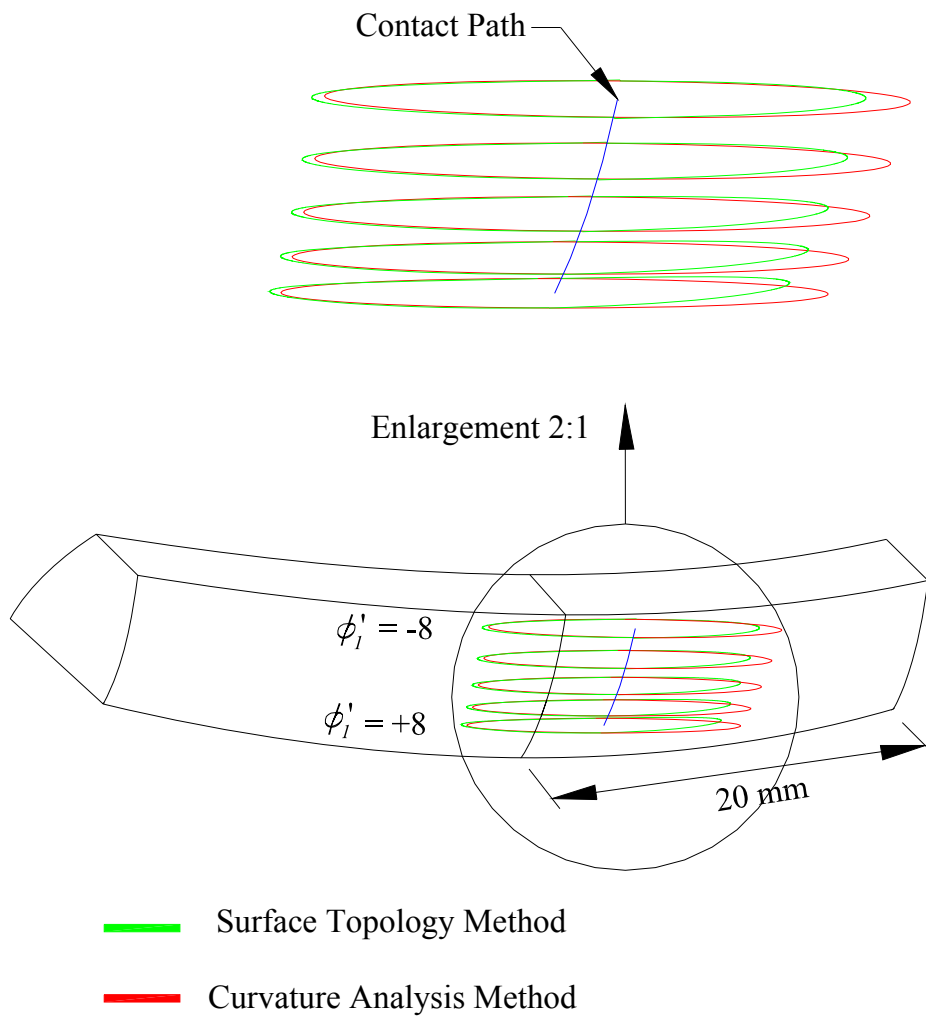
Contact ellipses and bearing contacts on the pinion surface under horizontal axial-misalignment $\Delta\gamma_h = 3'$
